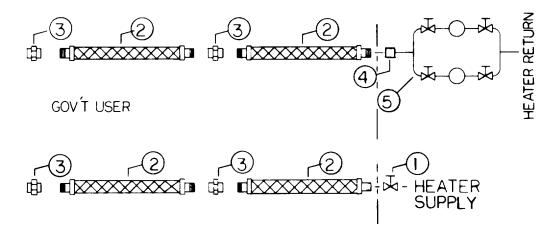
ASSEMBLY OF HEAT TRANSFER HOSE & UNIONS, HOT OIL HEATER TO GOVERNMENT USER.
